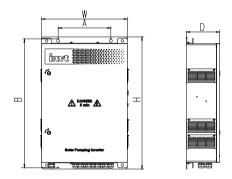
IP54 inverter dimensional drawing IP54 inverter dimensions (unit: mm)
